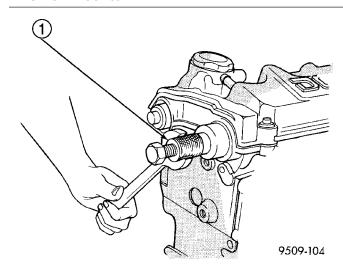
Camshaft Oil Seal - Removal With C-4679A
